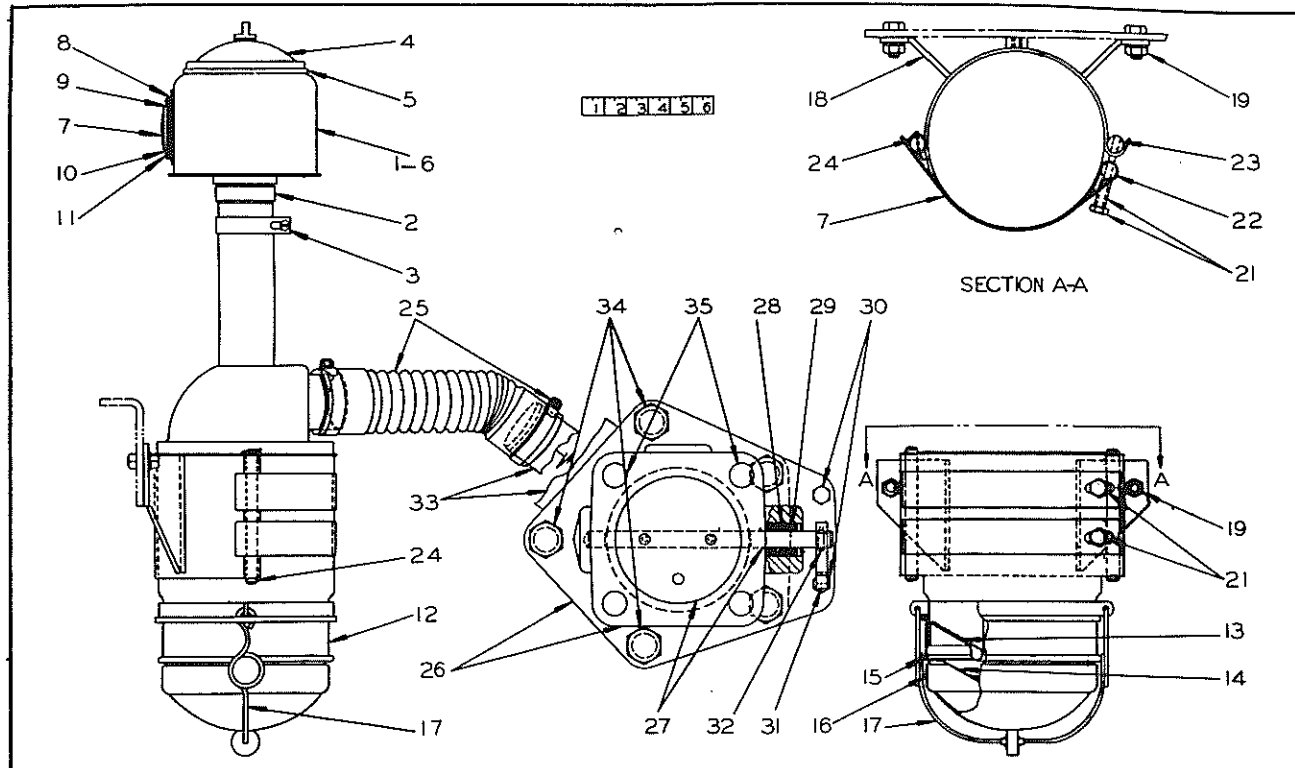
PRE-CLEANER AND AIR CLEANER
